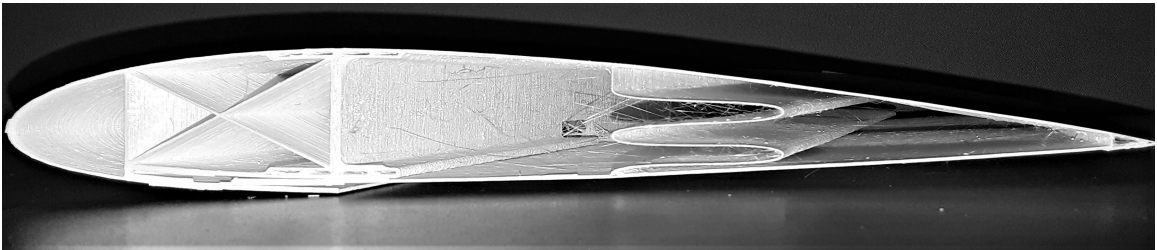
Cross sectional view of the printed morphing wing section prototype which shows the internal workings of the morphing mechanism.
